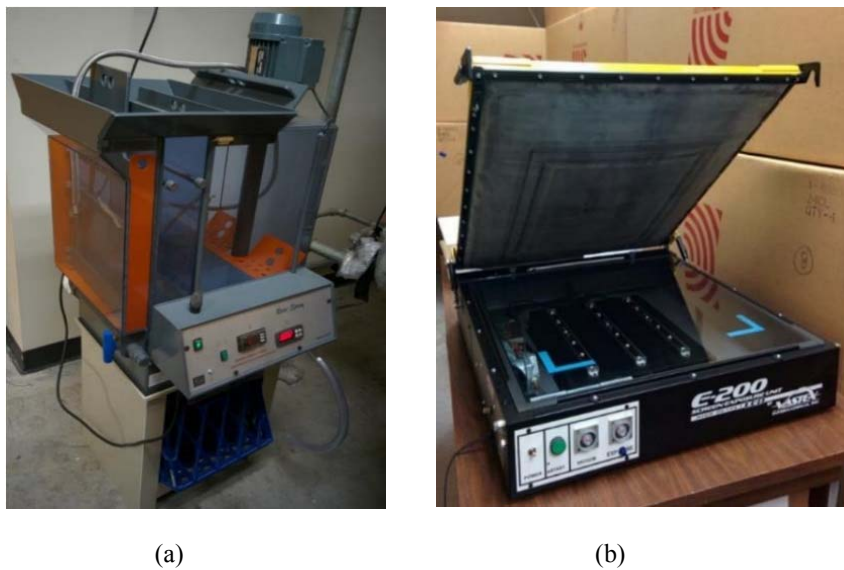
Etching Equipment. (a) Rota Spray, (b) UV Exposure Unit
